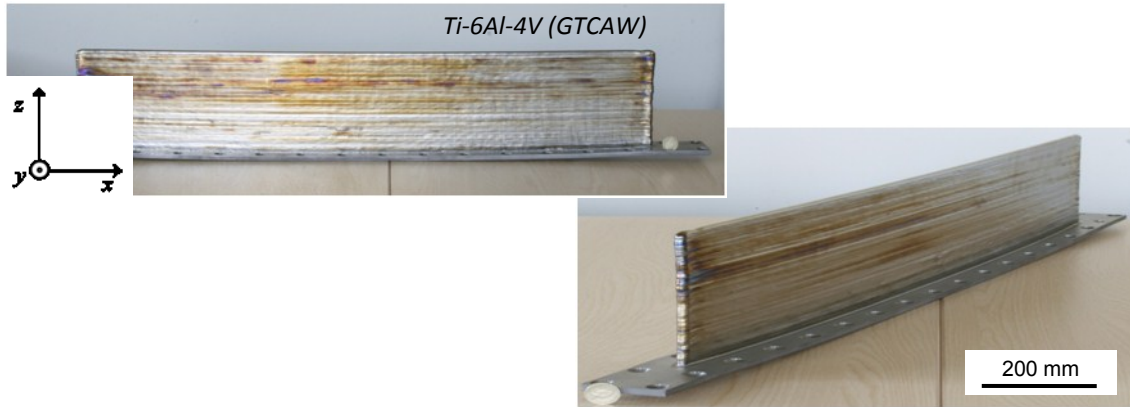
WAAM large structural Ti-6Al-4V component manufactured using GTCAW, with dimensions 1000 mm × 200 mm × 4 mm.
